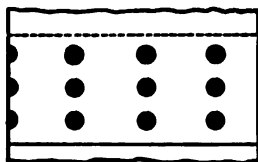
Treble-riveted lap-joint chain-riveted.
